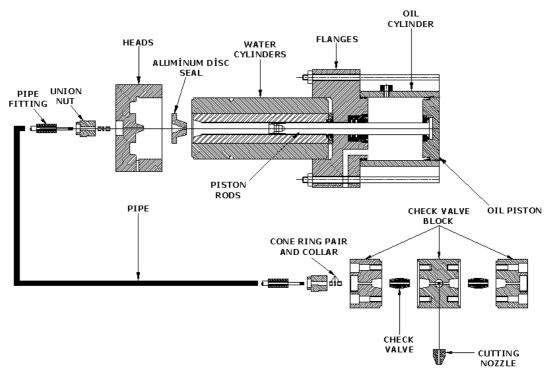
Exploded view of the left side of new design intensifier and high pressure parts
